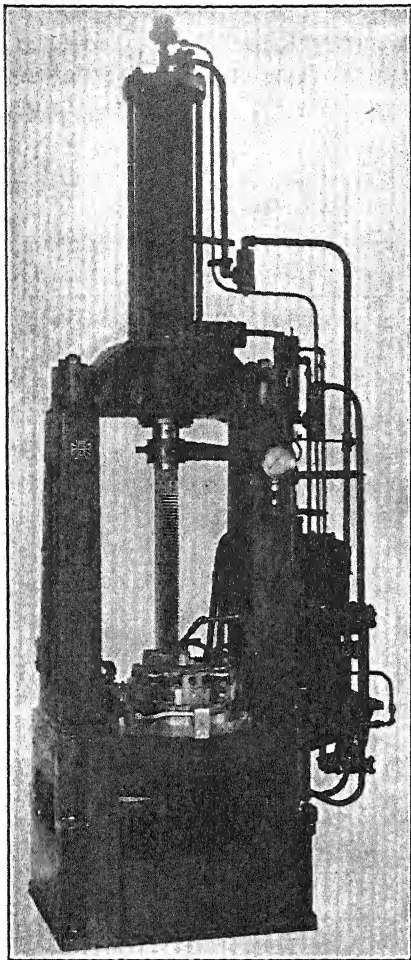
The Oilgear Company 10-Ton, 2-Column, Vertical Automatic Push-Broaching Press, Equipped with Broaching Tool and Automatic Indexing Fixture for Surface Broaching the Ends of the Spokes of Cast Steel or Malleable Cast-Iron Wheels.
